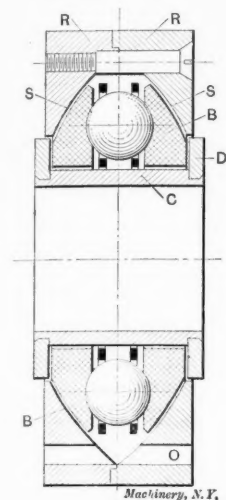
Bearing Designed for Axial Thrust in Either Direction
